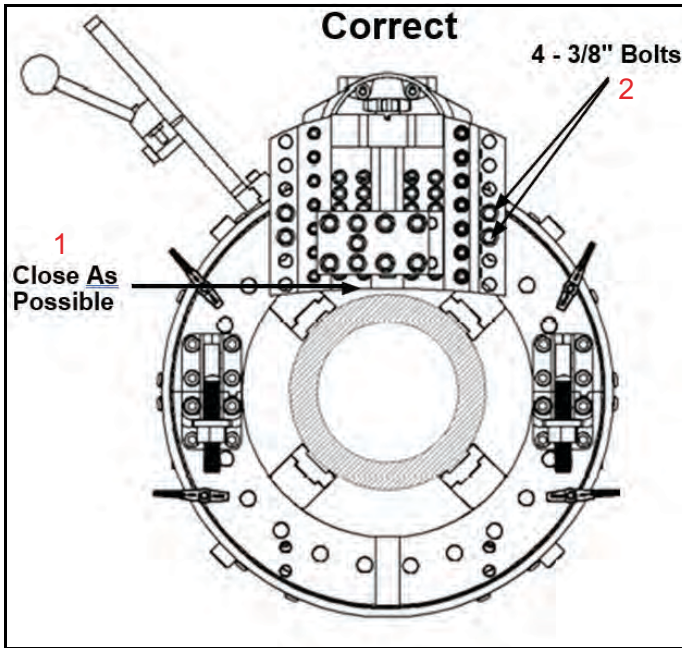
CORRECT TOOL SLIDE ASSEMBLY POSITION
